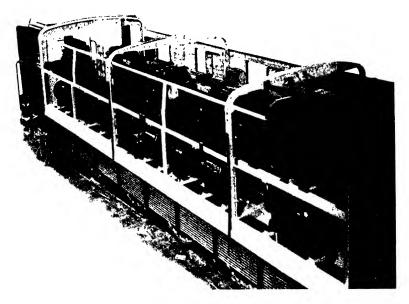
Swiss Federal 2-D₀-1 locomotive with external sheeting removed.
